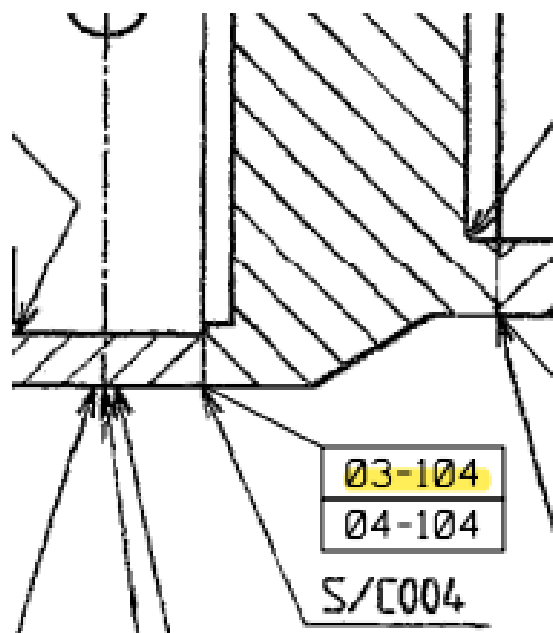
ANO-1 Item No. C1.30 Weld Configuration [1-5]
